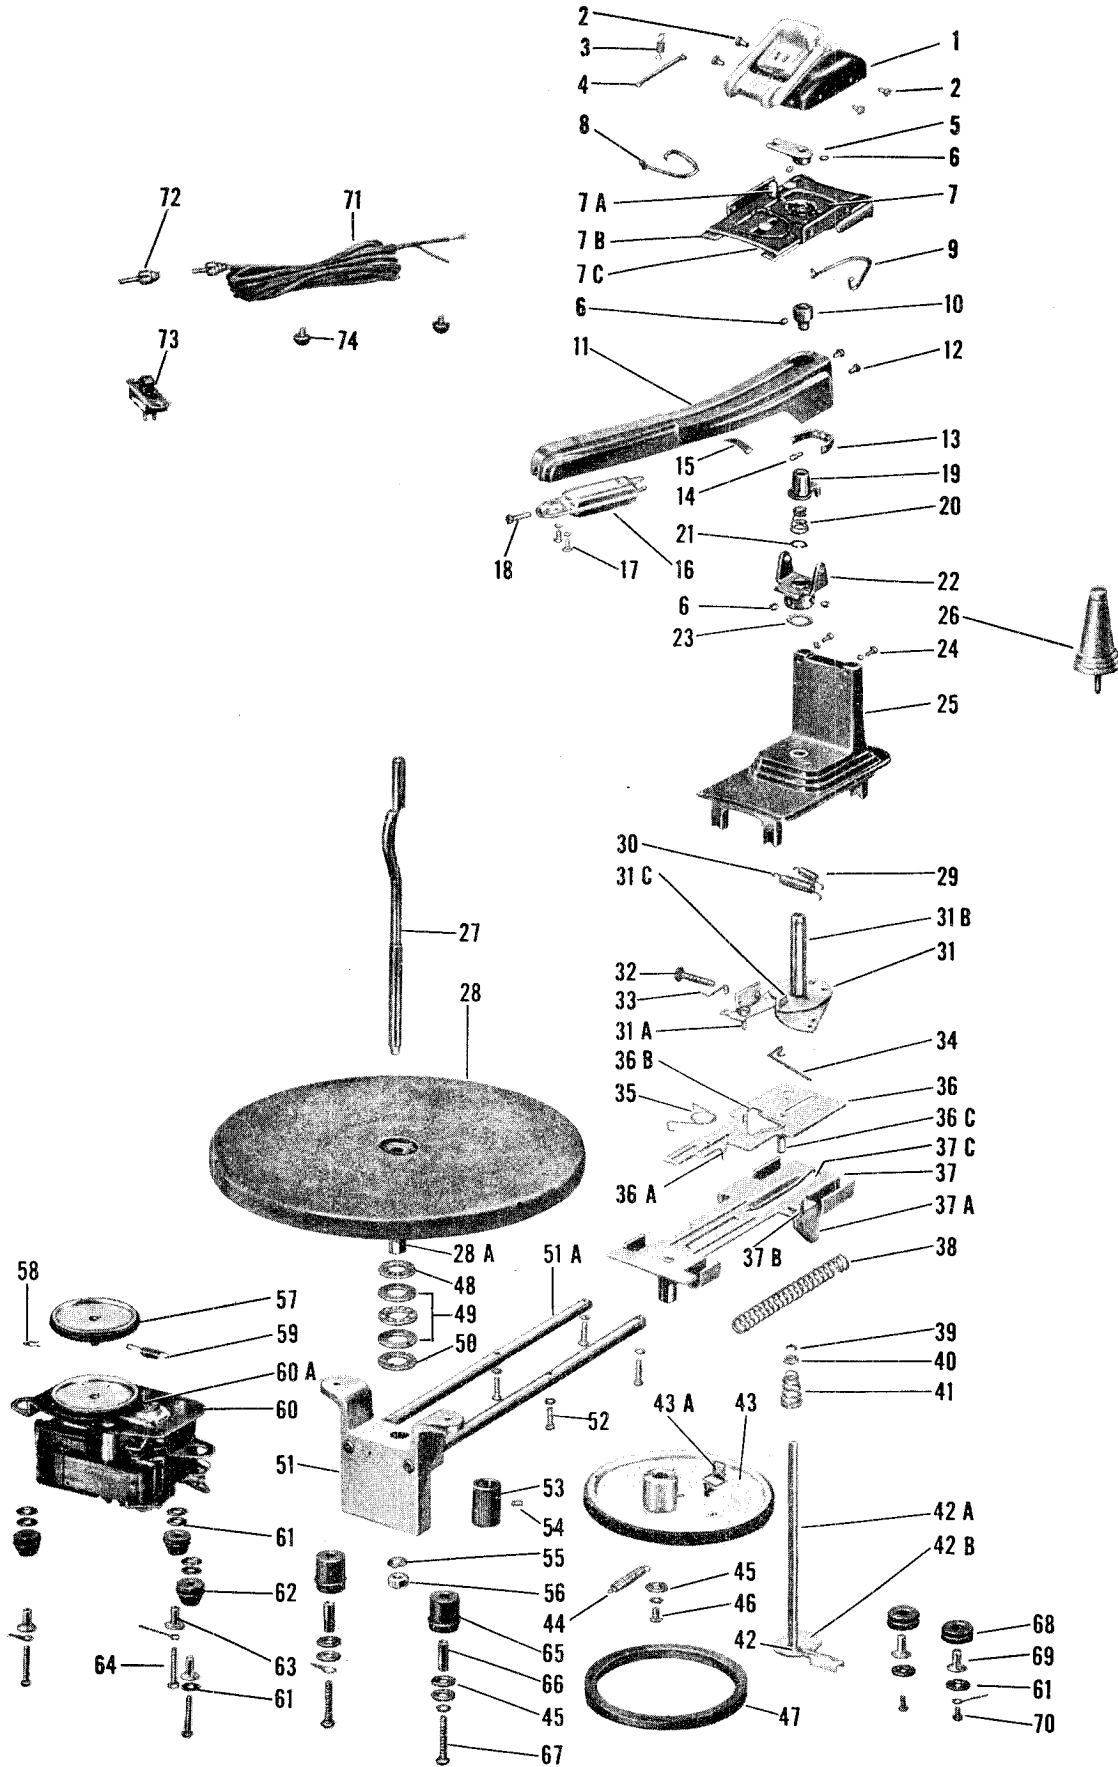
RECORD CHANGER, EXPLODED VIEW
